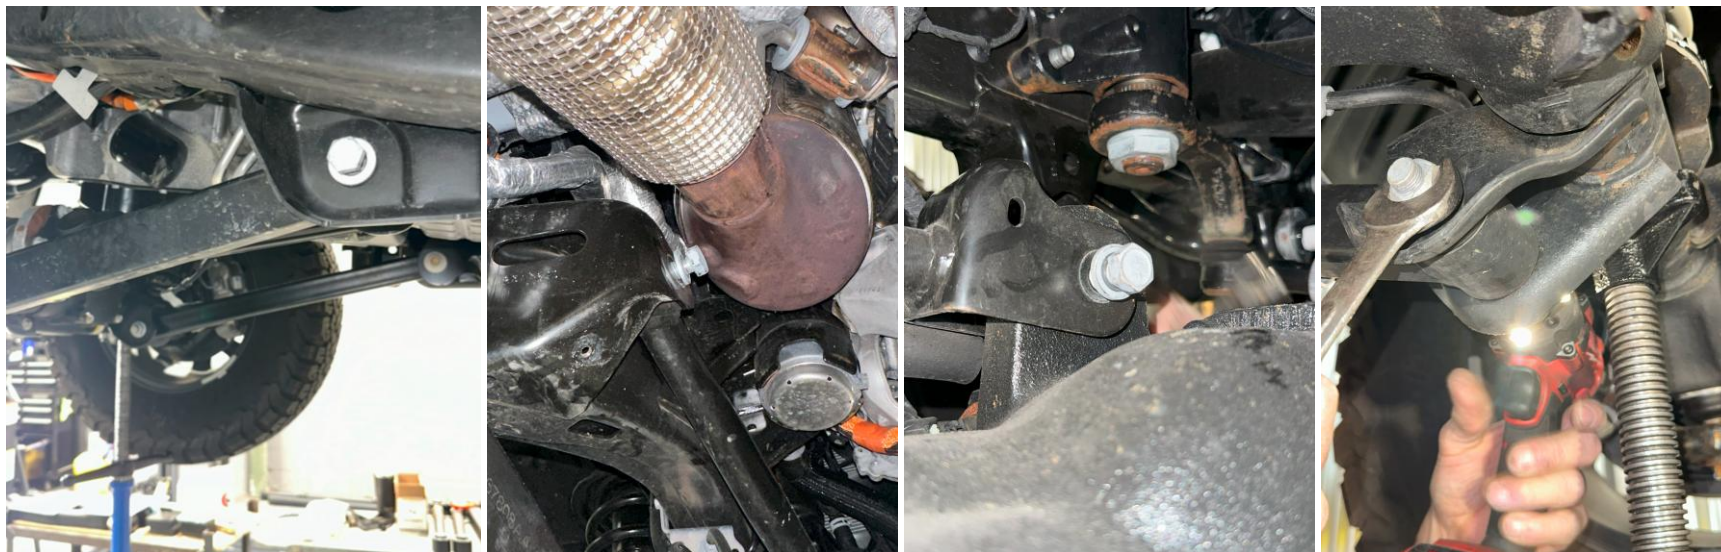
Lower/upper frame-side control arm bolts, and lower/upper axle-side control arm bolts
